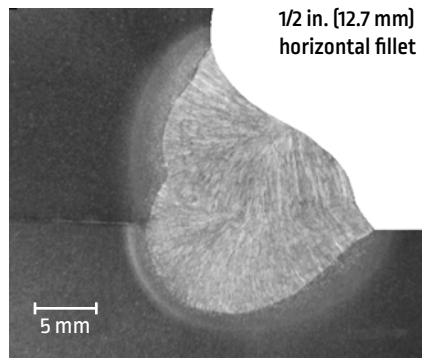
Macro Photo of a Tandem Arc 1/2 In. (12.7 mm) Fillet Weld
